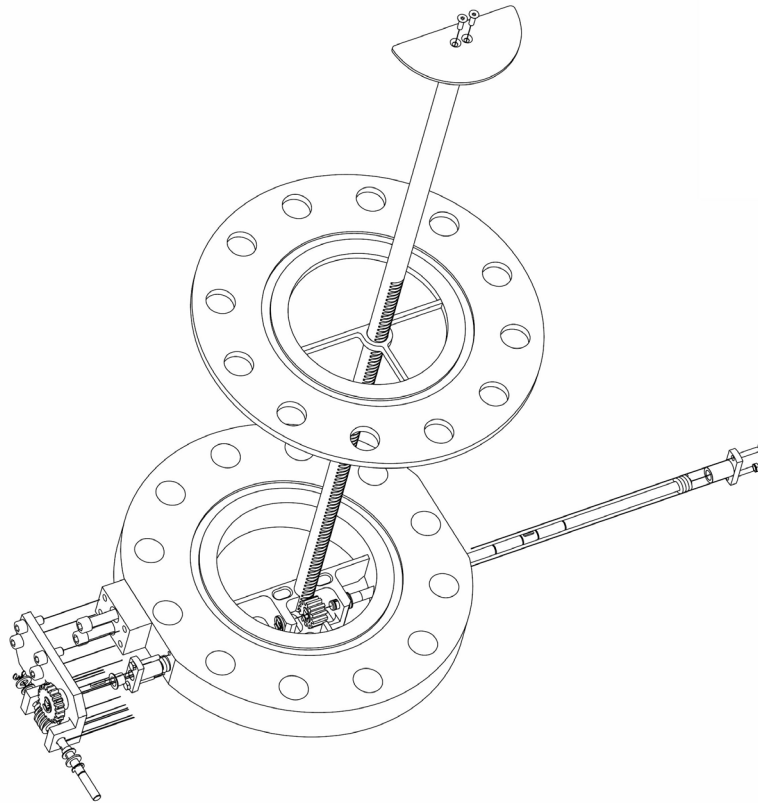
Sketch of the movable obstacle with driving mechanism - a half-moon shaped horizontal plate mounted on top of a toothed rod
